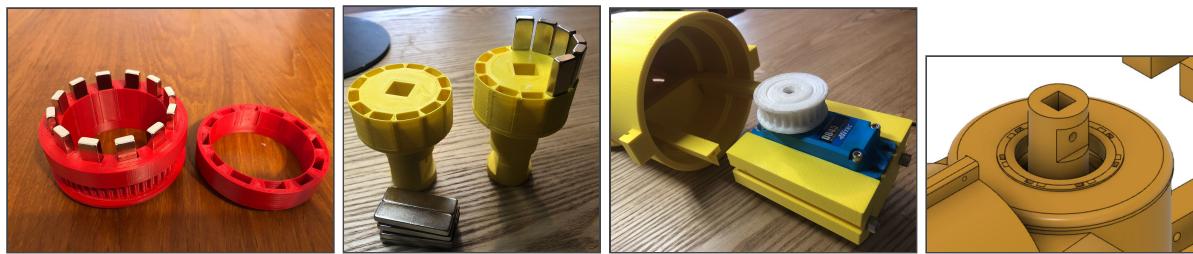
from left to right, the outer shaft; inner shaft; moving part of servo mounting; joint lids
